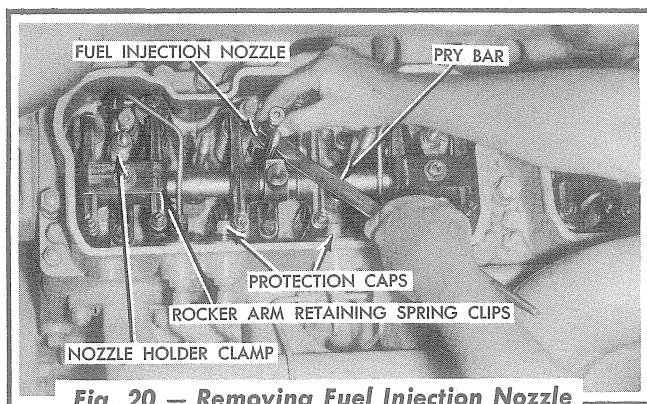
Removing Fuel Injection Nozzle (Tractors Serial No. 4001 and Above)
